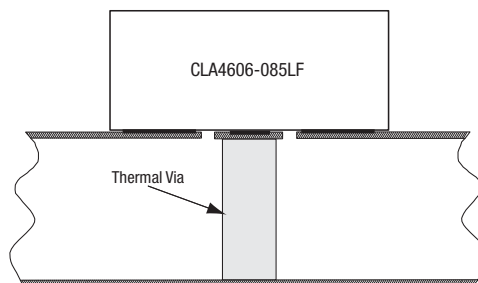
Cross-Sectional View of Suggested Mounting for CLA46XX-085LF PIN diodes
